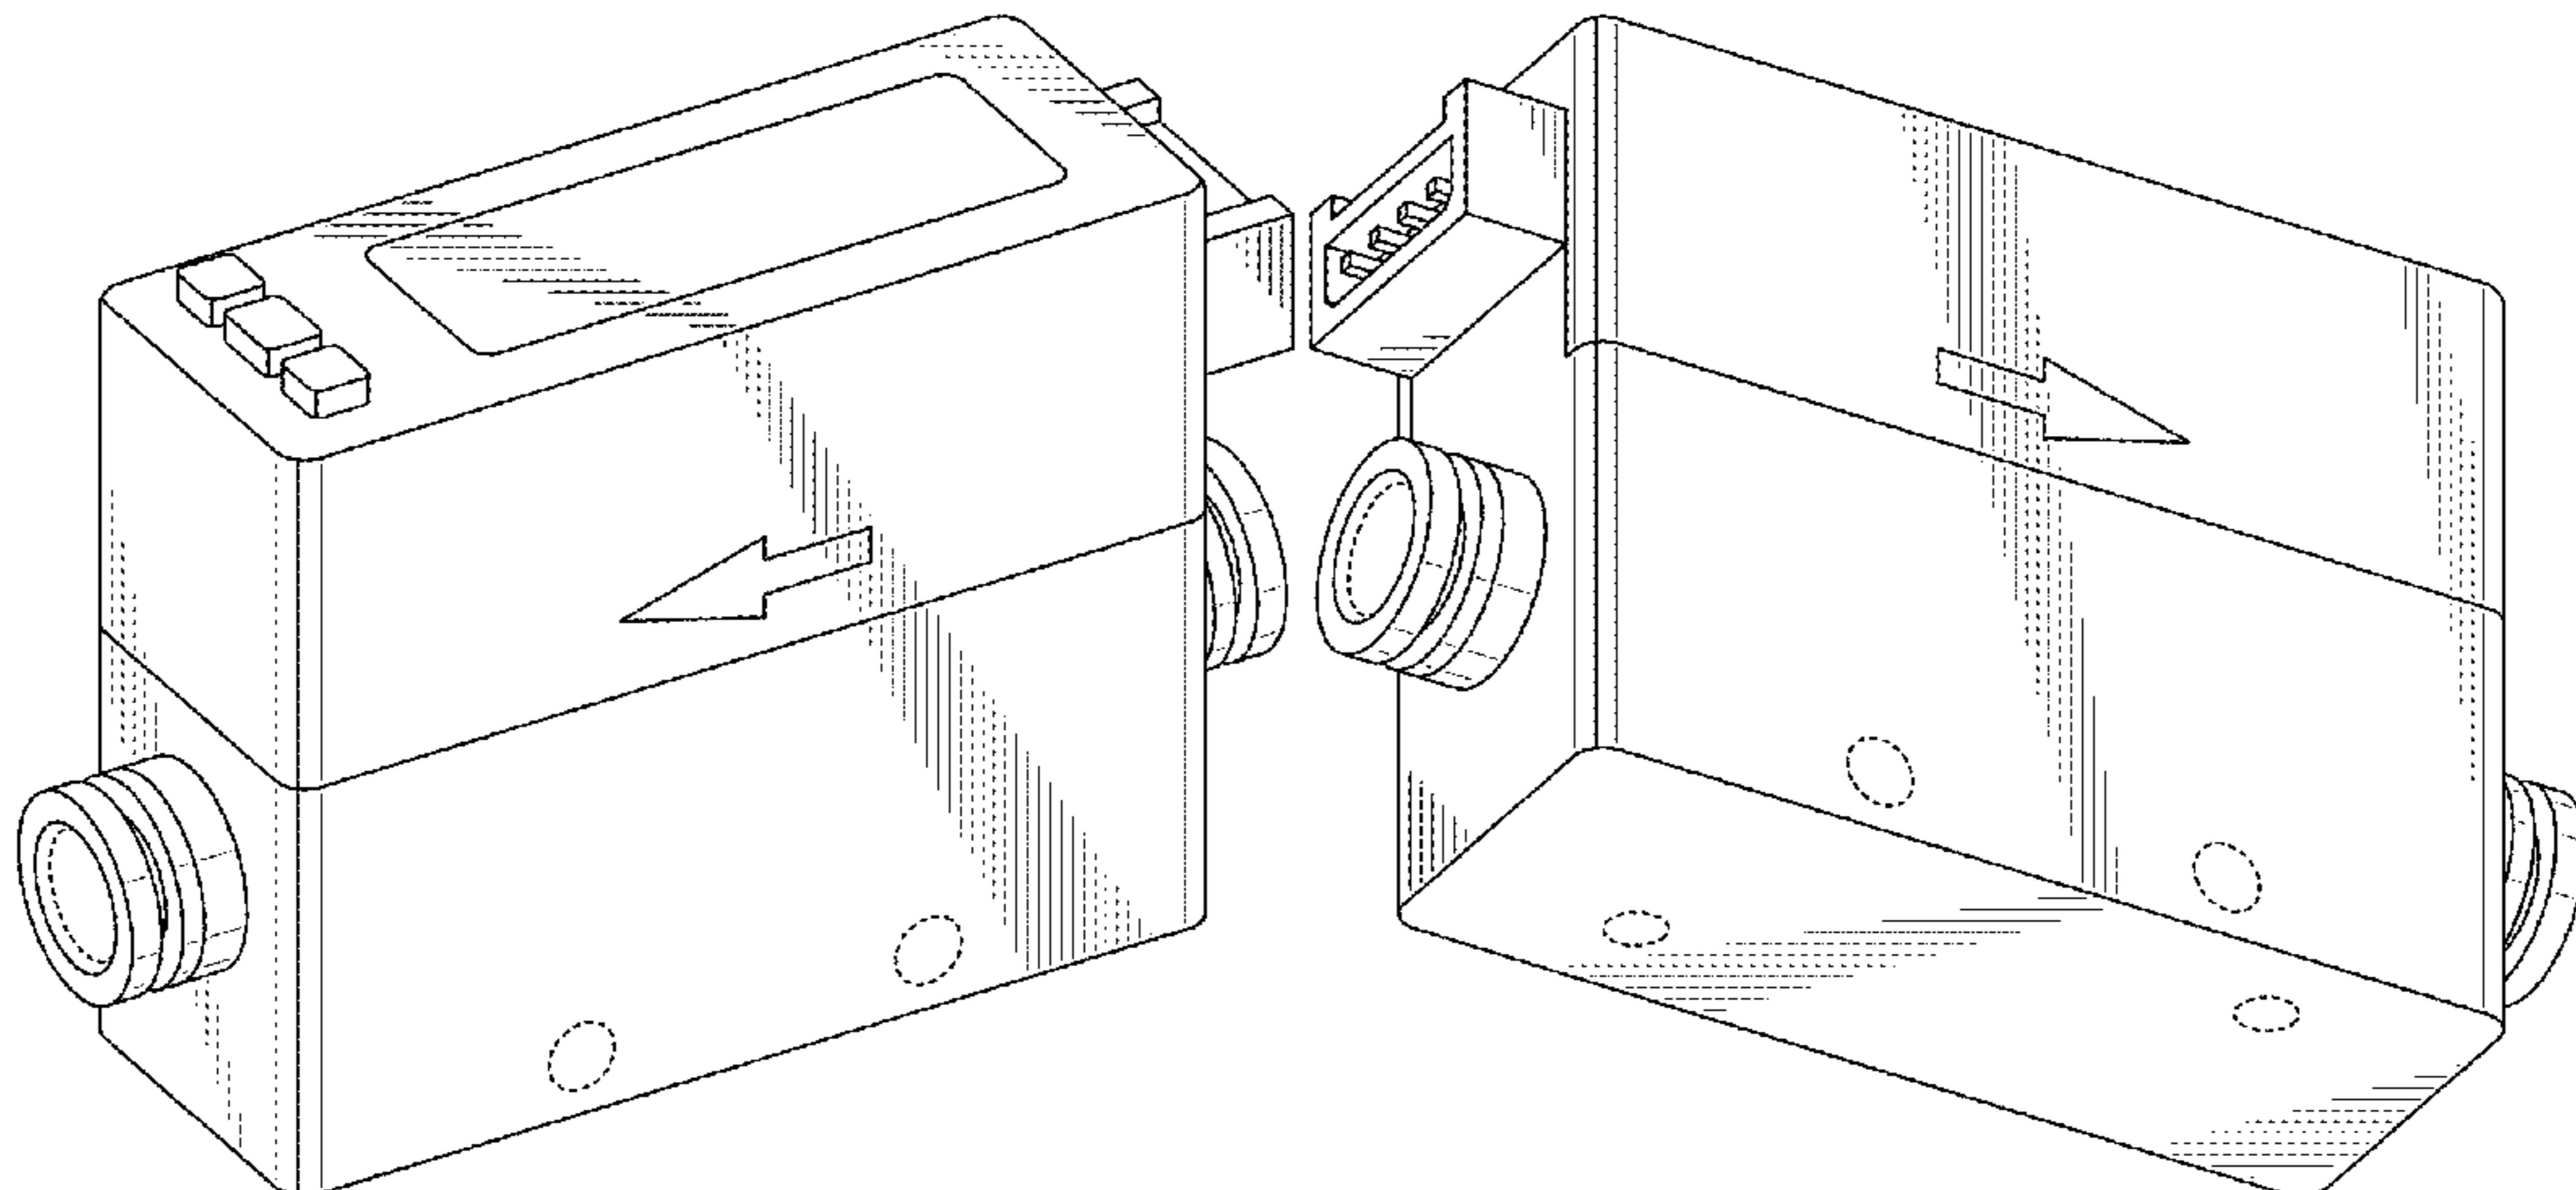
is a rear, bottom and right side perspective view of FIG. 33;
